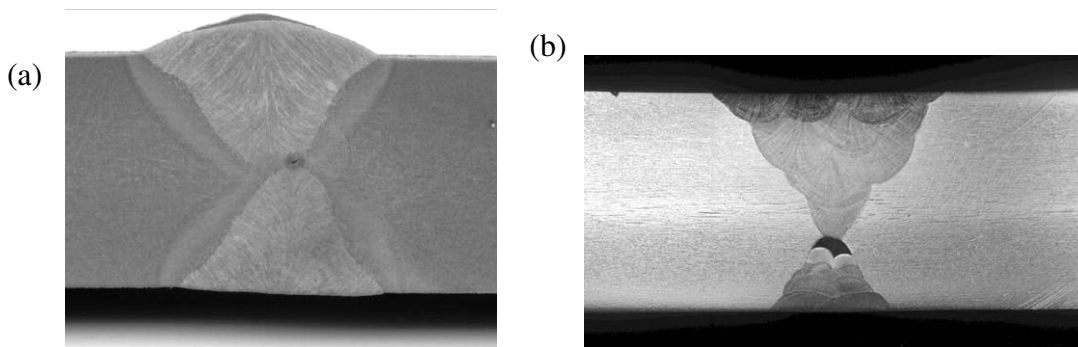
a) Incomplete Penetration and b) Lack of (Root) Fusion Defect (Courtesy of BB Welding Services) [64].
